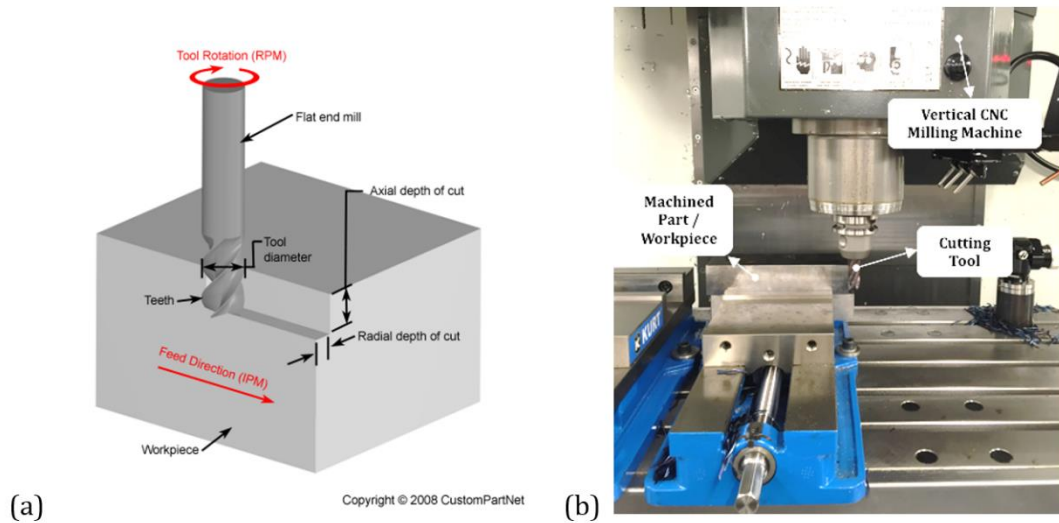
(a) Illustration of milling operation and the machining process parameters (Source: Custompartnet), (b) Milling operations set up on a CNC machine.
